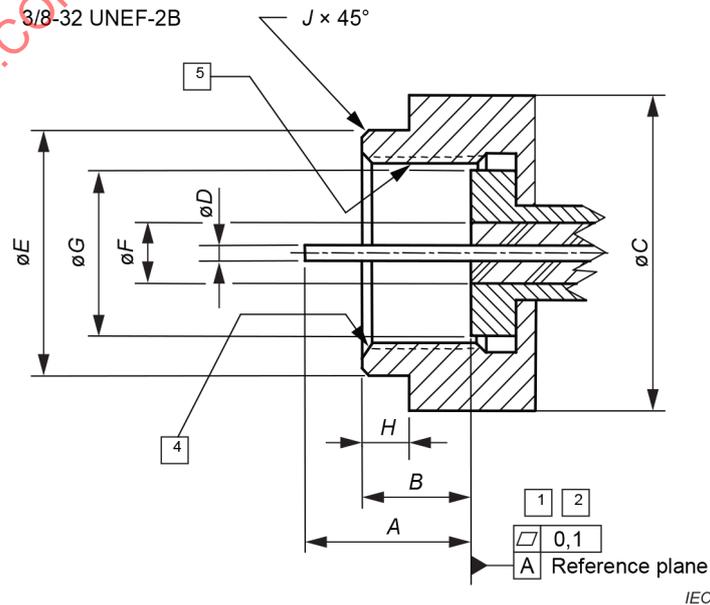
Outdoor “F” type male plug (for dimensions, see Table A.2)
